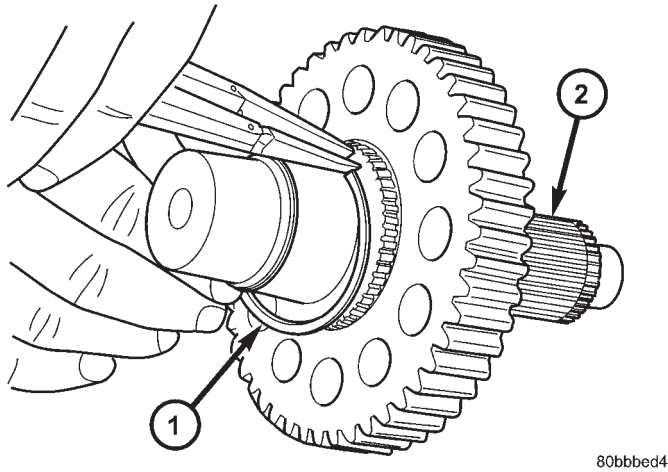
Front Output Shaft, Drive Gear And Chain Removal
